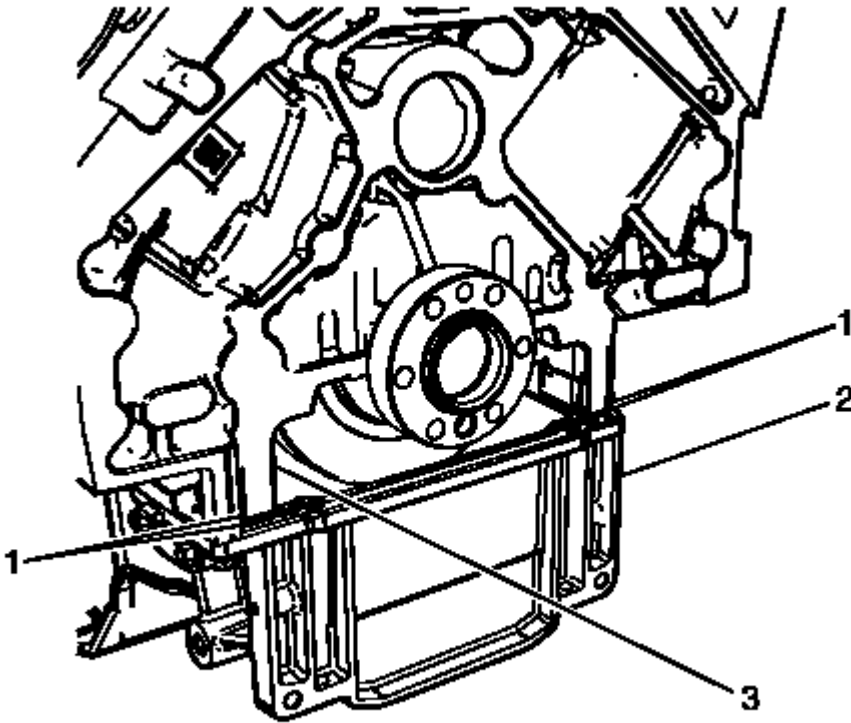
Locating Surfaces Of Oil Pan & Engine Block
